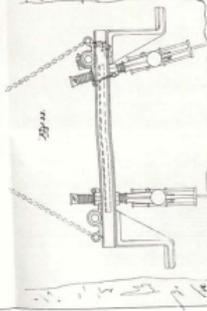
Detail of a mechanical component, possibly a valve or piston part.
